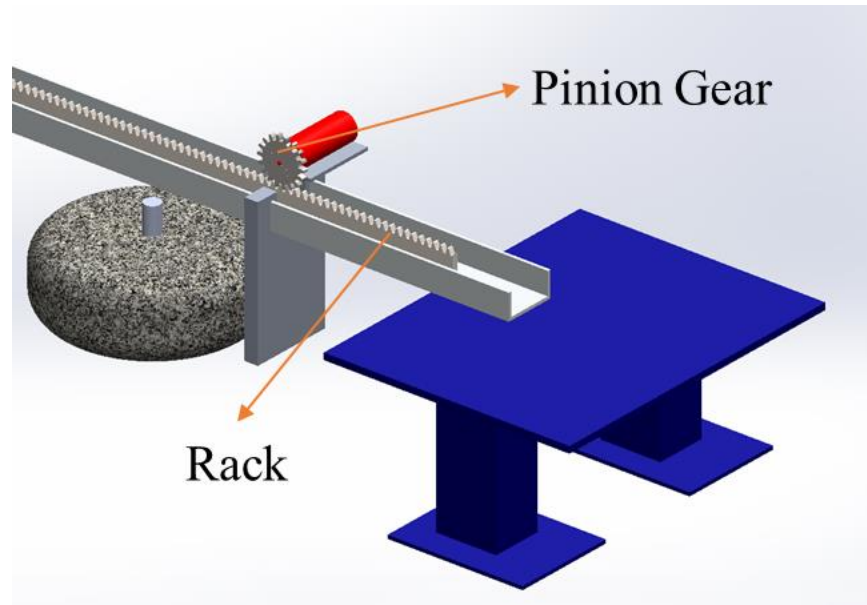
Rack and Pinion mechanism. The pinion is attached to the motor's shaft. Once the motor's shaft rotates, the pinion engages with the rack and moves the part that pushes the curling stone. The Red cylinder is the main actuator / motor.
